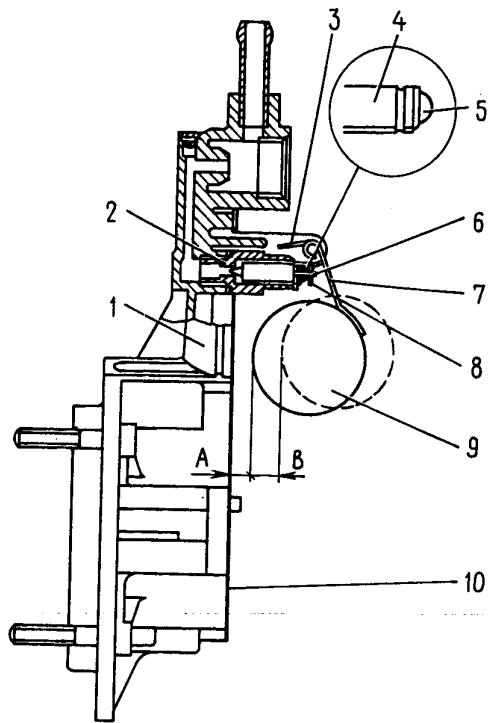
Float Chamber Fuel Level Adjustment:
